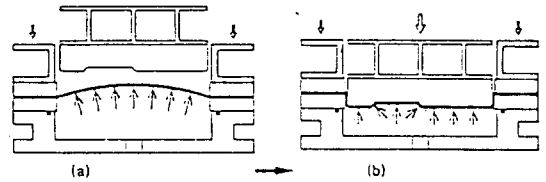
Fabrication of a door by hydraulic counter-pressure forming : (a) pre-bulging; (b) drawing.
